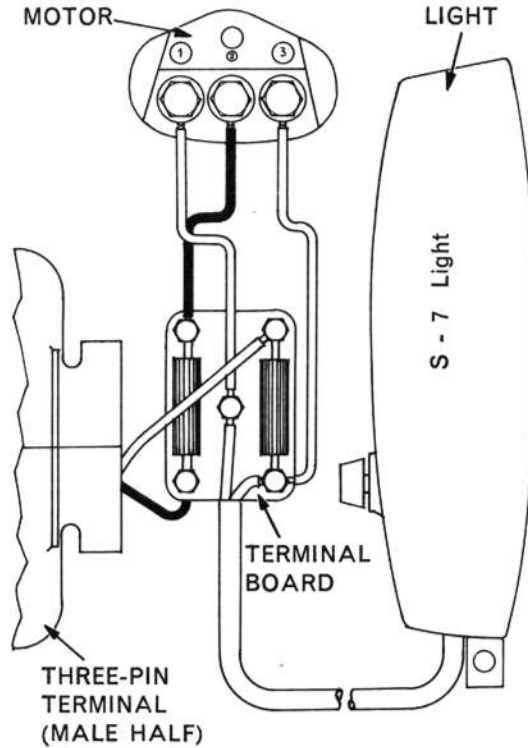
B.A. 60 Motor Terminal Board Connection Guide.
